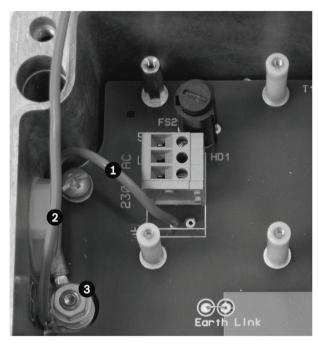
Mains input with shield removed, showing terminal block HD1 before wiring
